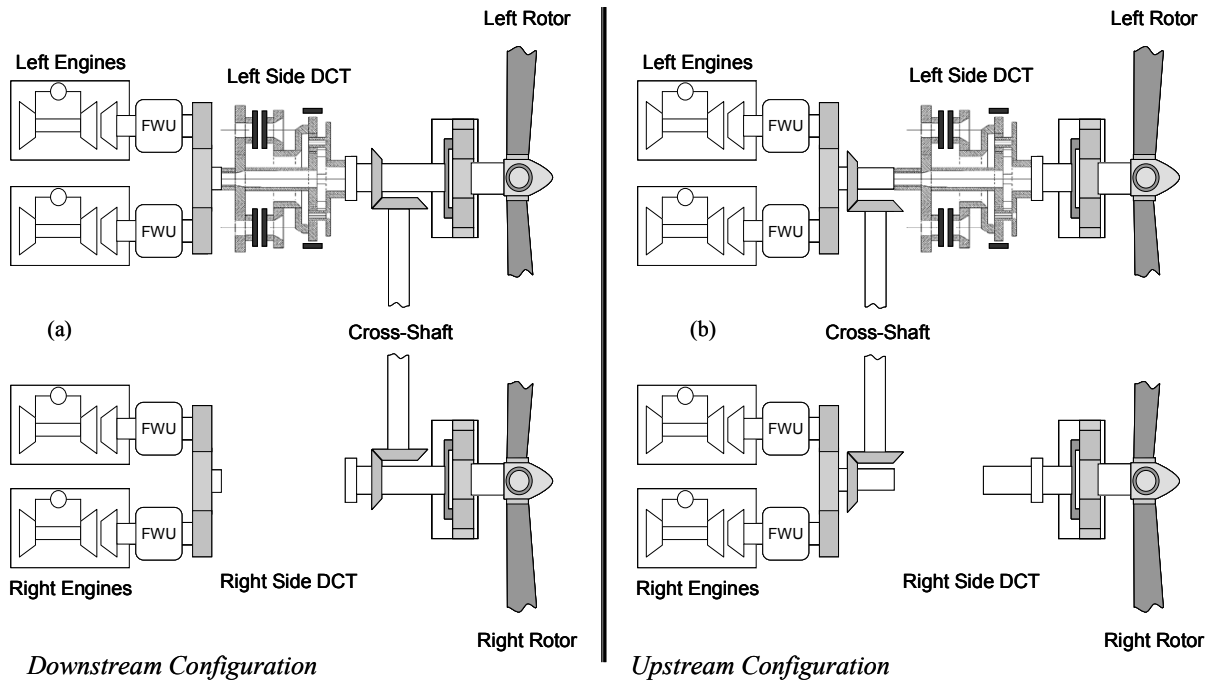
Two-speed tiltrotor design cases; (a) cross-shaft downstream from DCT gearboxes; (b) cross-shaft upstream from DCT gearboxes.
